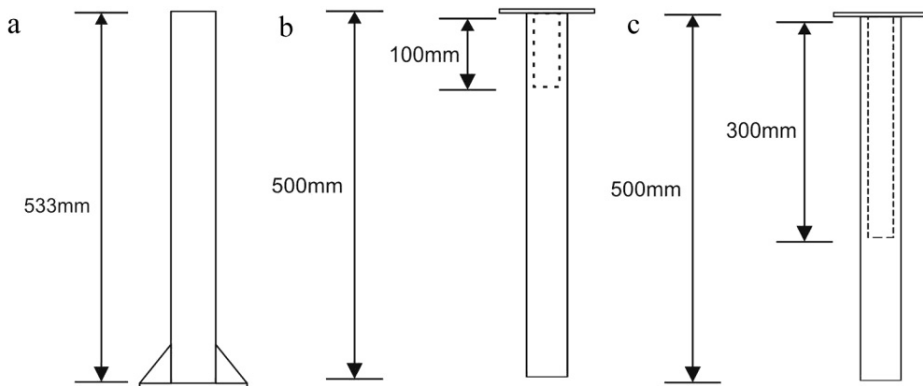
a) Design for the longest axis and the shortest worker, b) Design for the shortest axis and the tallest worker.
